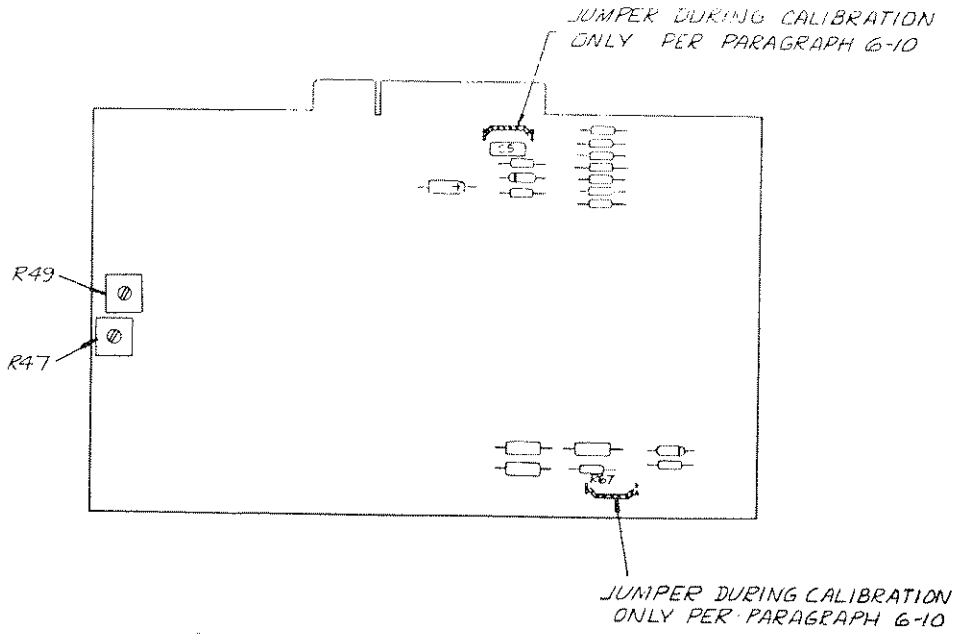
Adjustment and Terminal Identification for Assembly No. 102524
